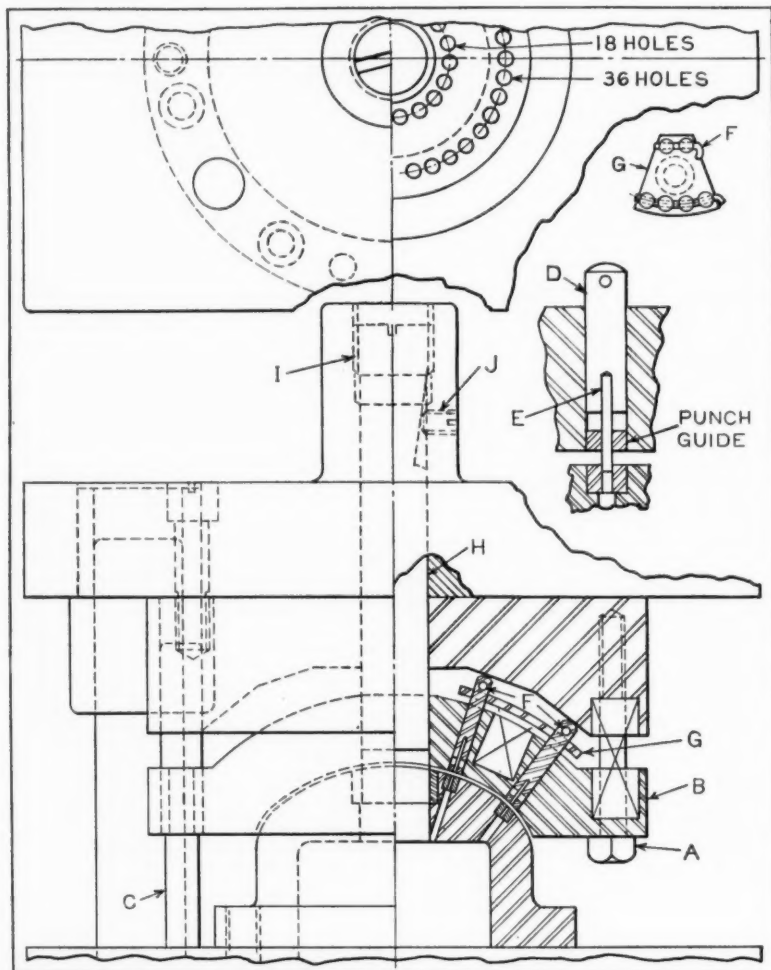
Die Equipped for Piercing Fifty-four 0.028-inch Holes in Sprinkler Top and One 3/4-inch Hole in a Mating Part
